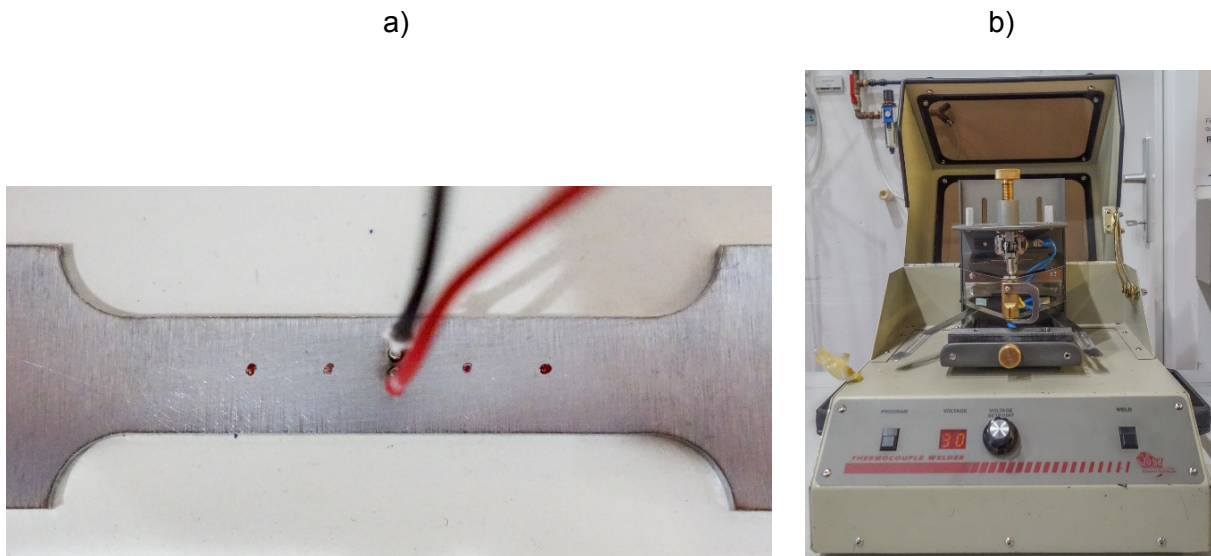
a) Tensile specimen with welded central thermocouple and marks for further thermocouples b) Thermocouple welder by DSI
